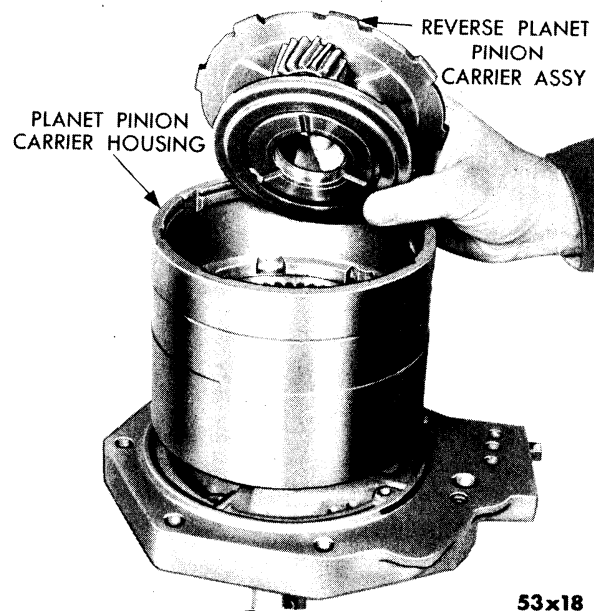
Removal and Installation of Reverse Planet Pinion Carrier Assembly
